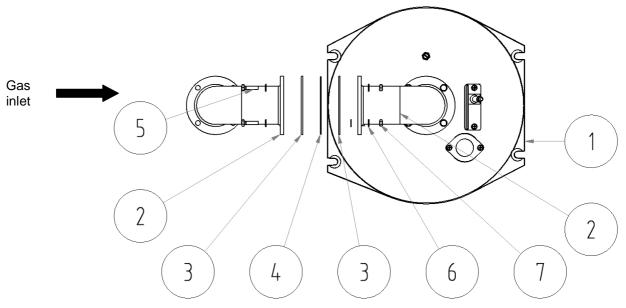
VIADRUS CLAUDIUS K 2 assembly
